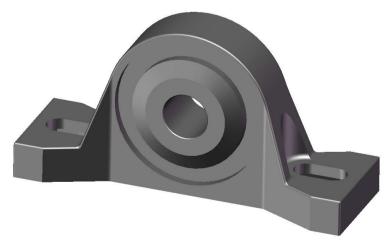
Sleeve bearing housing 3D model 图 1. 套筒轴承座三维模型
